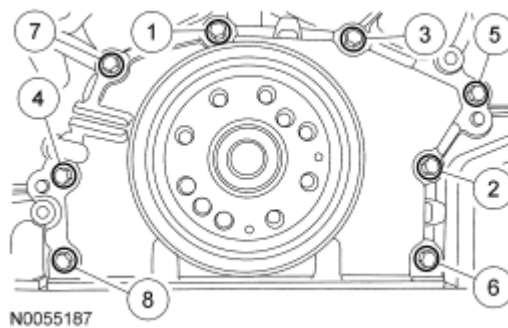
Installing Crankshaft Rear Seal Retainer Bolts In Sequence
